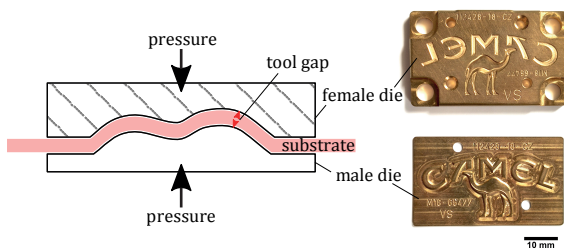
Schematic sectional view of a closed embossing tool with inserted substrate and an example of a conventional embossing tool made of brass
